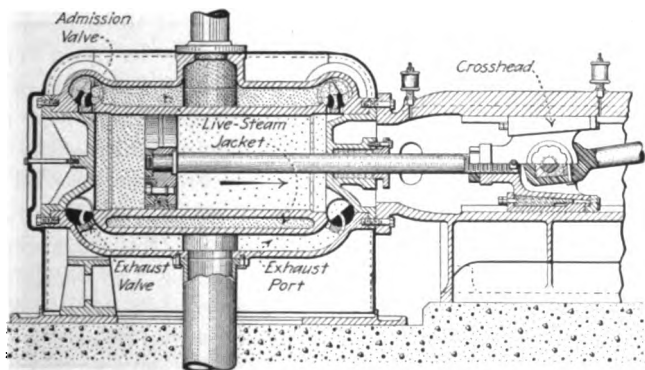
Jacketed steam-engine cylinder. (Rice and Sargent Corliass engine, Providence Engineering Corporation.)
